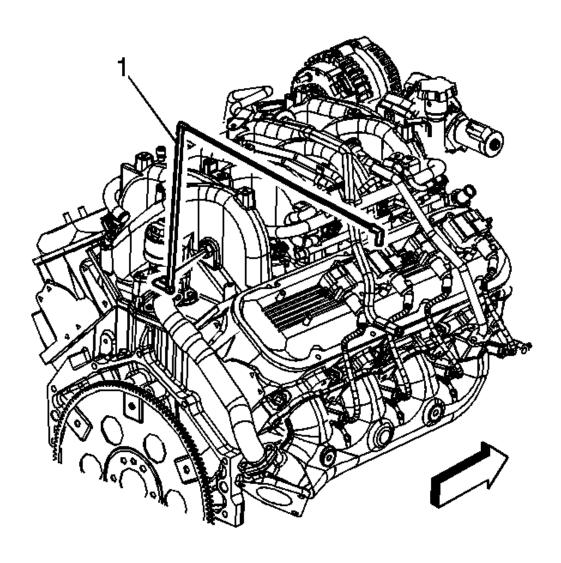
View Of Bypass Valve Vacuum Hose Courtesy of GENERAL MOTORS CORP.
